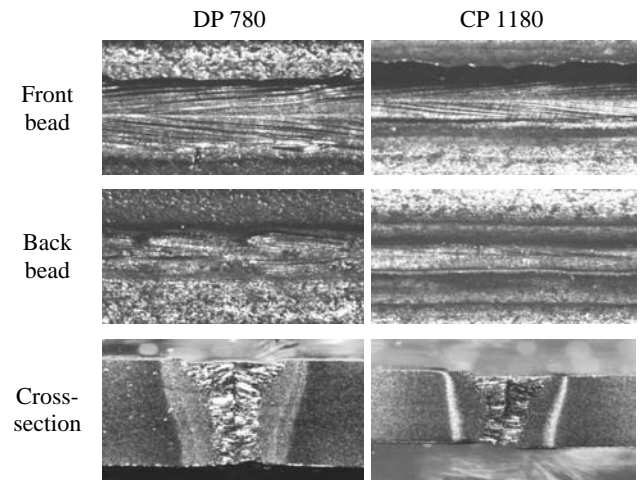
Weld bead shapes for DP 780 and CP 1180 steel
